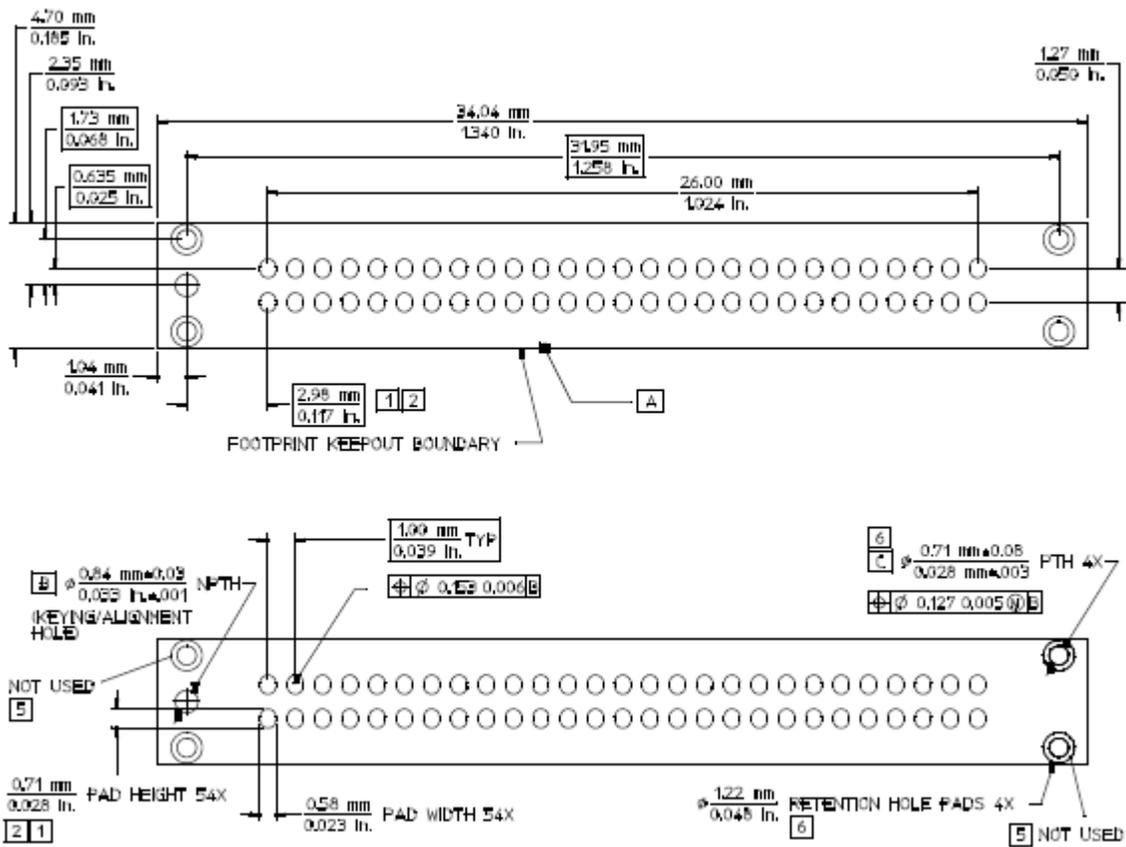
Mechanical layout for Industry-Standard connectorless probing
